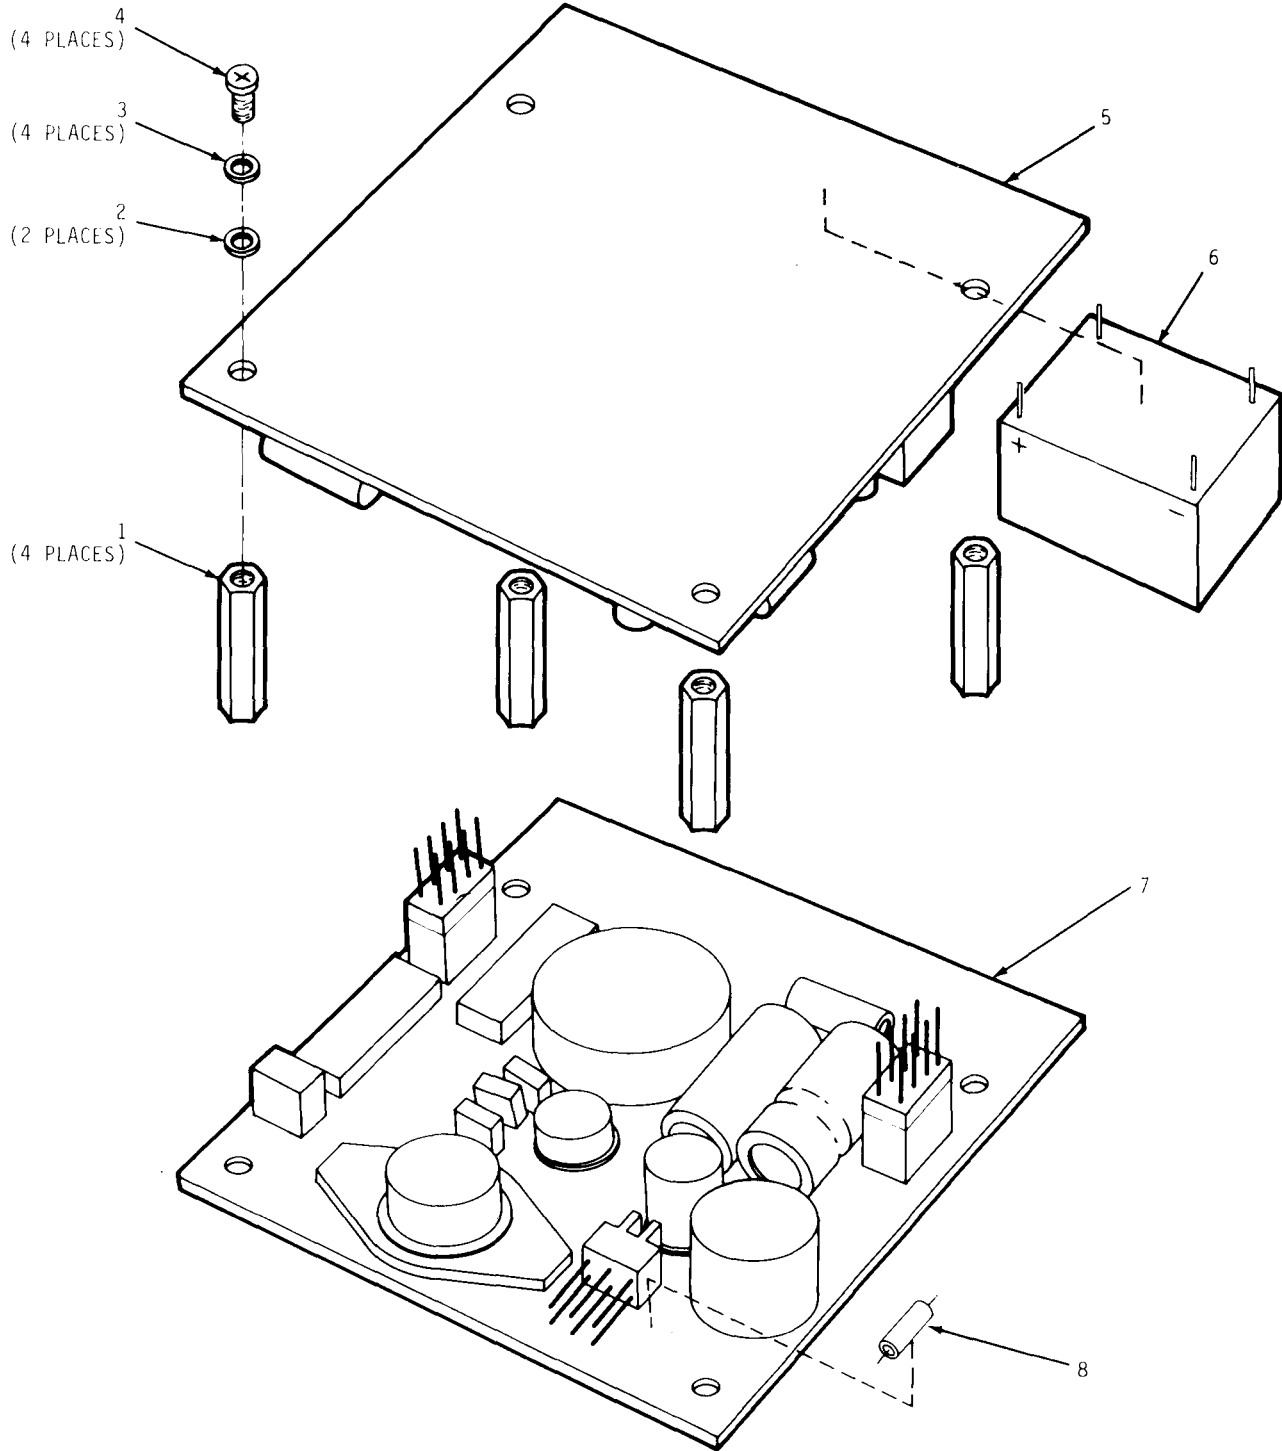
Power supply assembly (1A6A1PS1) (9355840),
